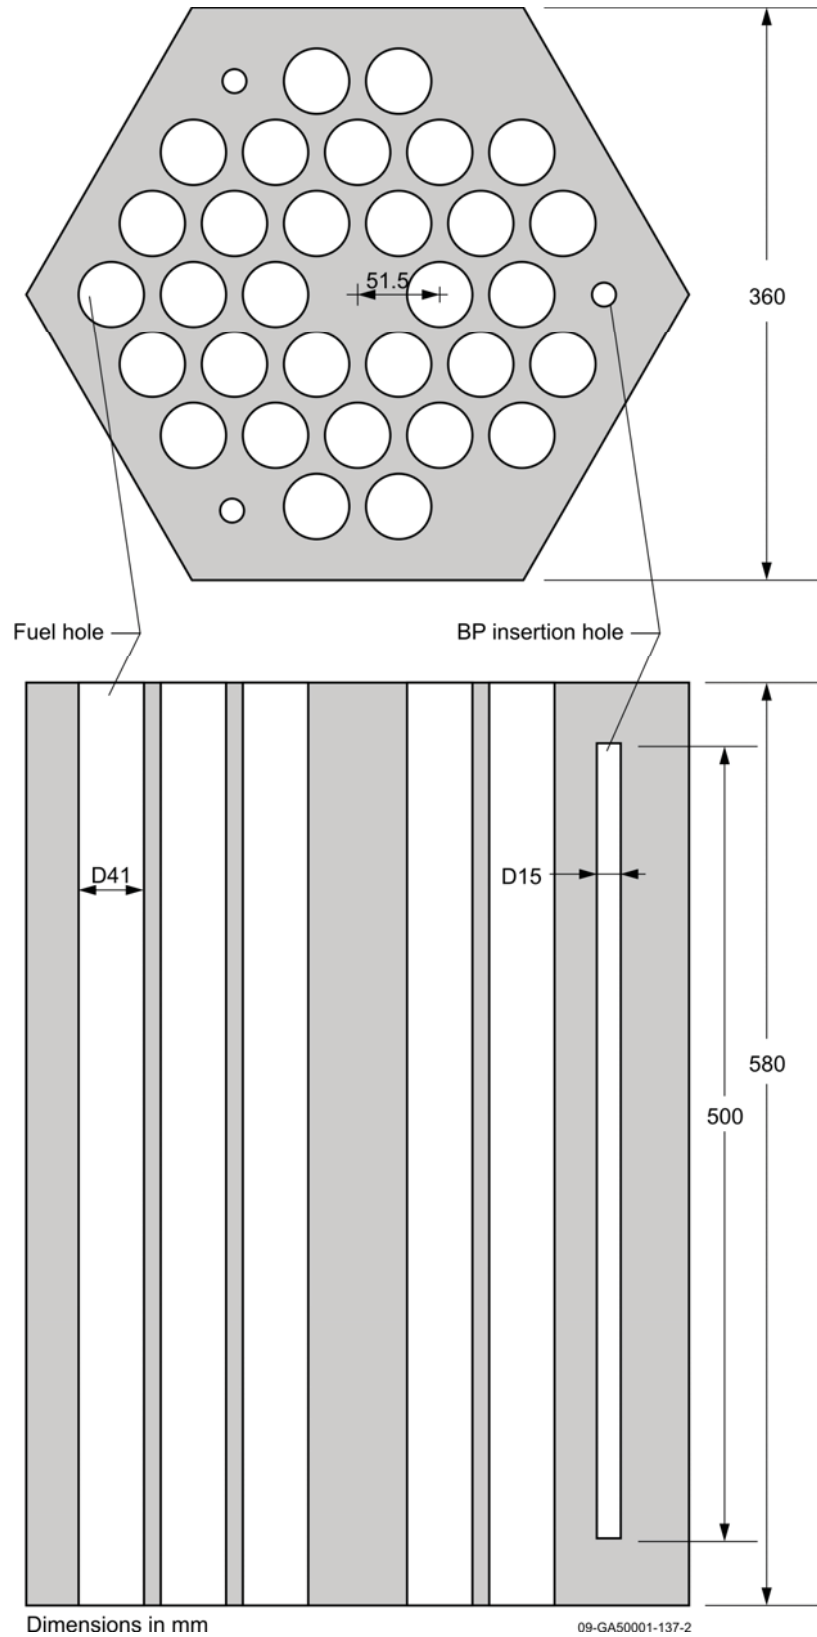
Fuel Block for 31-Pin Fuel Assembly. Dxx represents the diameter in xx (mm).
